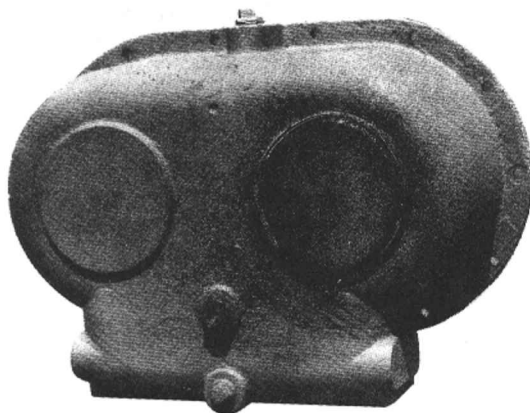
LOCATION OF TIMING GEAR BOLTS
